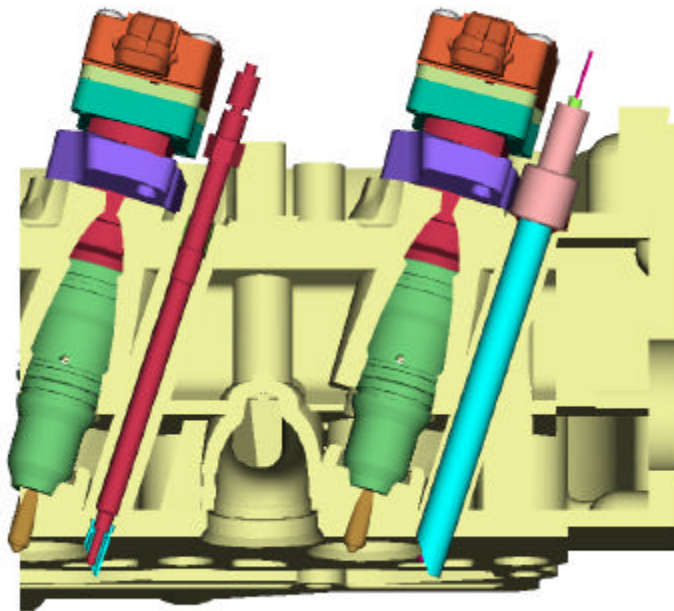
Sectional view of the surface-discharge plug in the cylinder head
